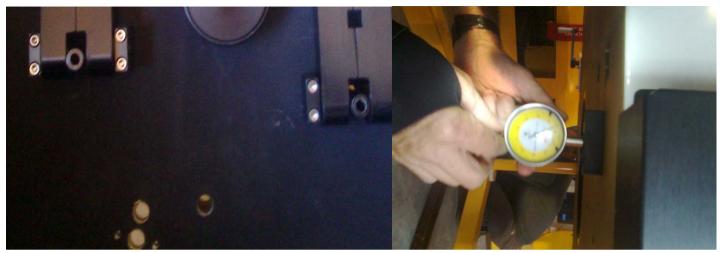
bottom central hole having two small holes both side is the position where we insert the dial gauges.
